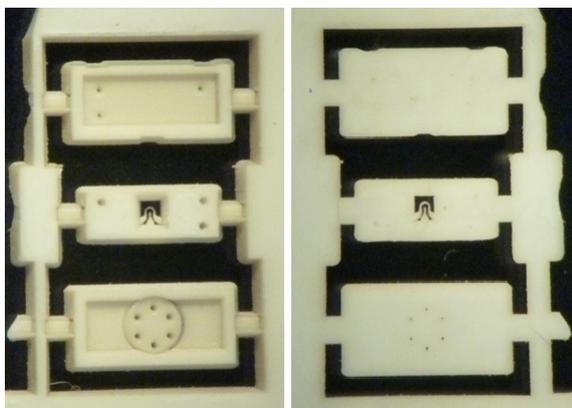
Photos of bottom (left) and top (right) views on 250 μm thick Al_2O_3 substrate with part of SOT-23 SMD package and microhotplate for MOX gas sensor after laser micromilling.
